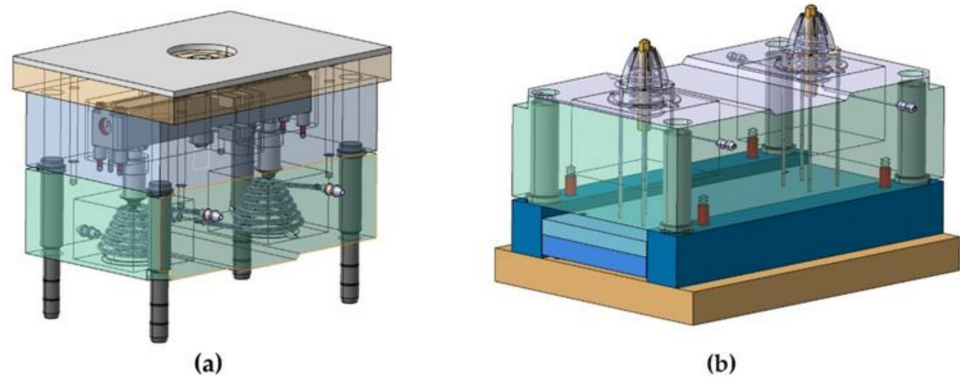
Final design of the mold including the hybrid cooling proposed in this paper. Mold of the plastic part injection area (a) and ejection area (b).
